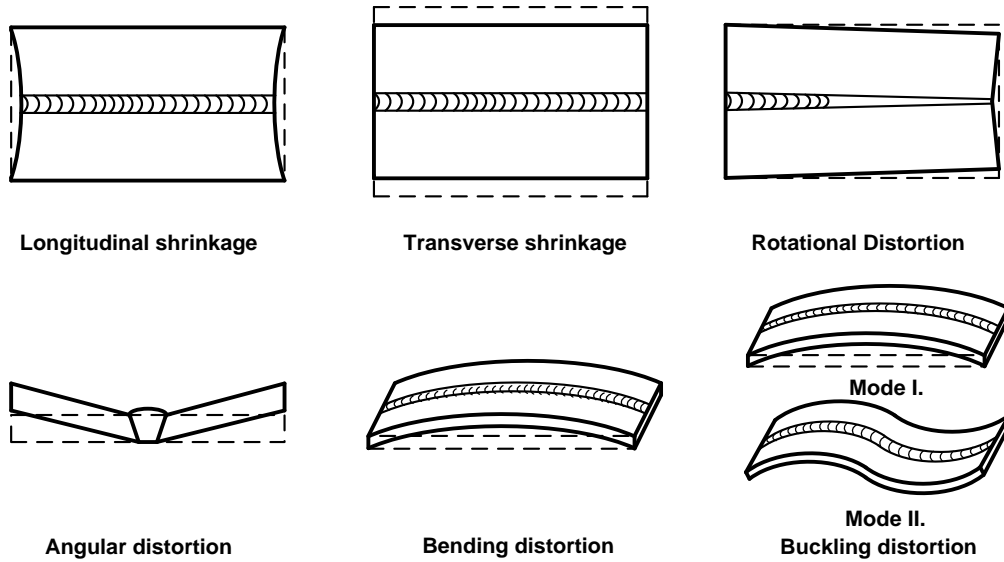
Common types of distortion caused by welding after [3]
